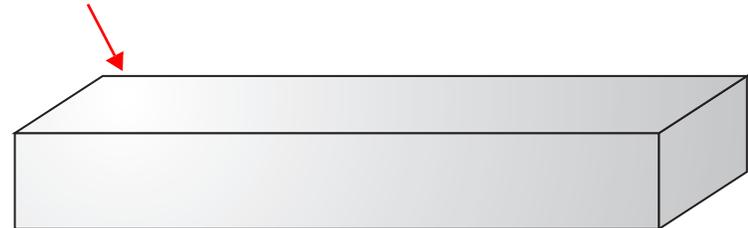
PF Roller Shaft Center Support Position Adjustment Jig and Level Block
